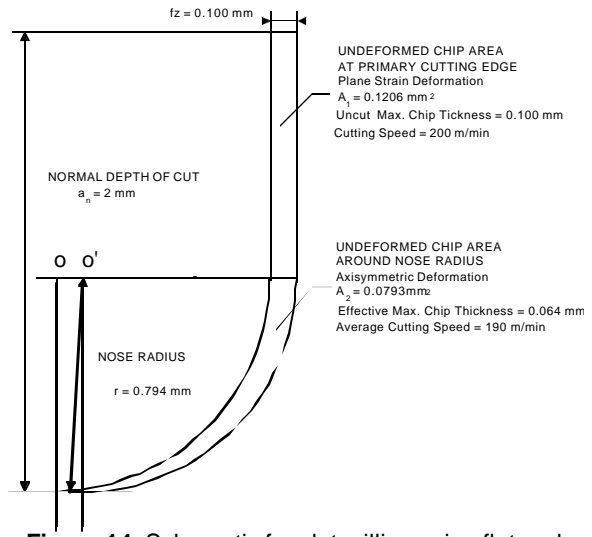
Schematic for slot milling using flat end mill inserts with nose radius
